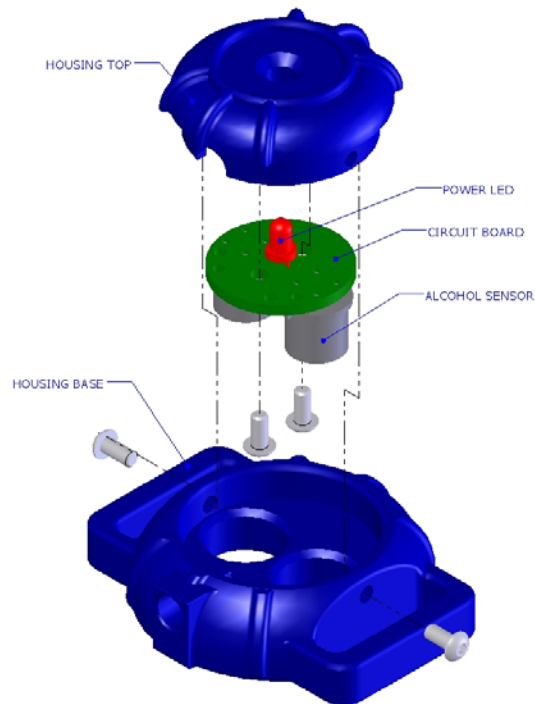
Exploded Diagram of Complete Transdermal Alcohol Sensor
